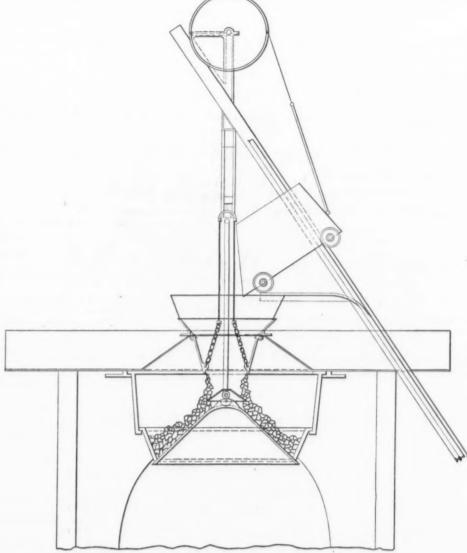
Side Elevation of Furnace Top, Showing Part of Inclined Furnace Hoist.
